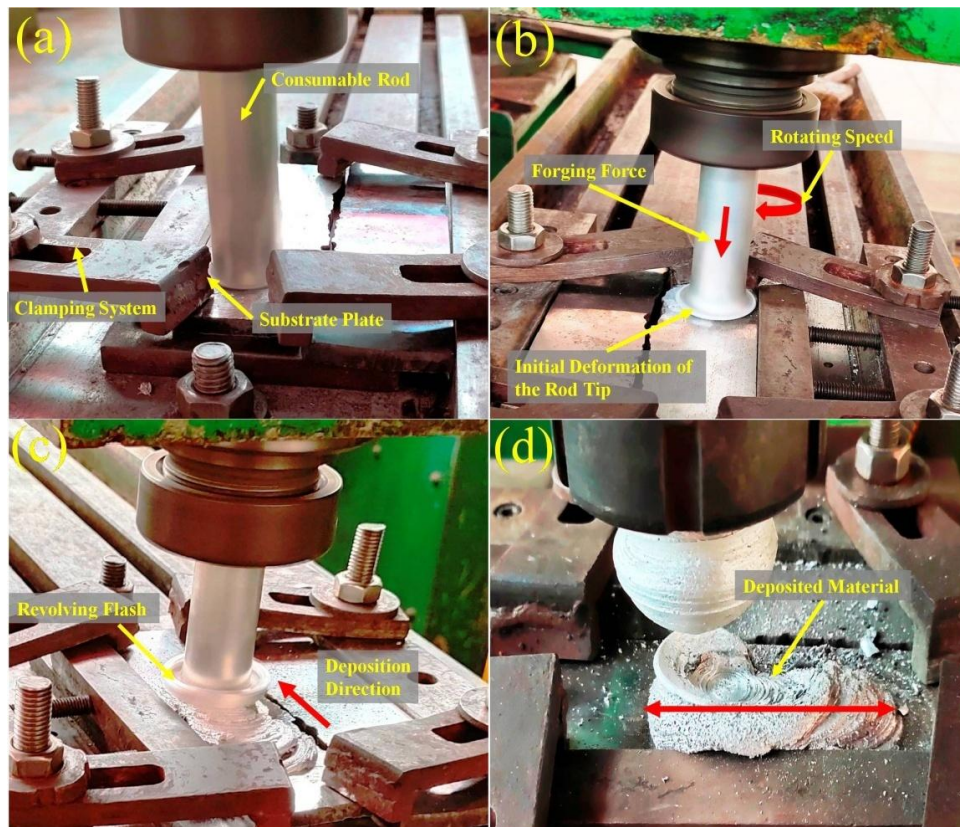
(a) Deposition of AA6063 by friction; (a) Experimental setup; (b) Initial plunging phase; (c) Deposition; (d) Deposited material.
